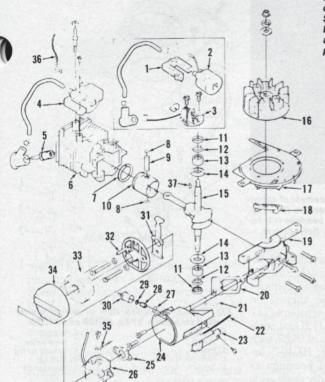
Exploded view of engine used on Models ST-100 and ST-120. Early Model ST-100 trimmers are equipped with breaker point ignition shown in in-
